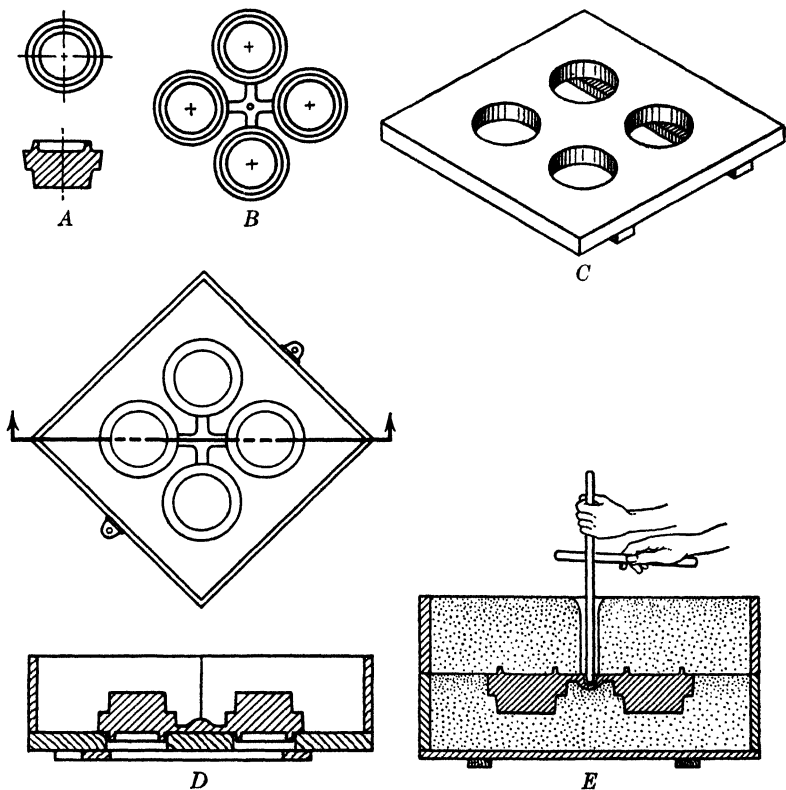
A. Pattern. B. Gated patterns. C. Follow board (wood match). D. Gated pattern and flask, assembled on follow board. E. Pattern being rapped before cope is drawn (section taken diagonally through mold).
